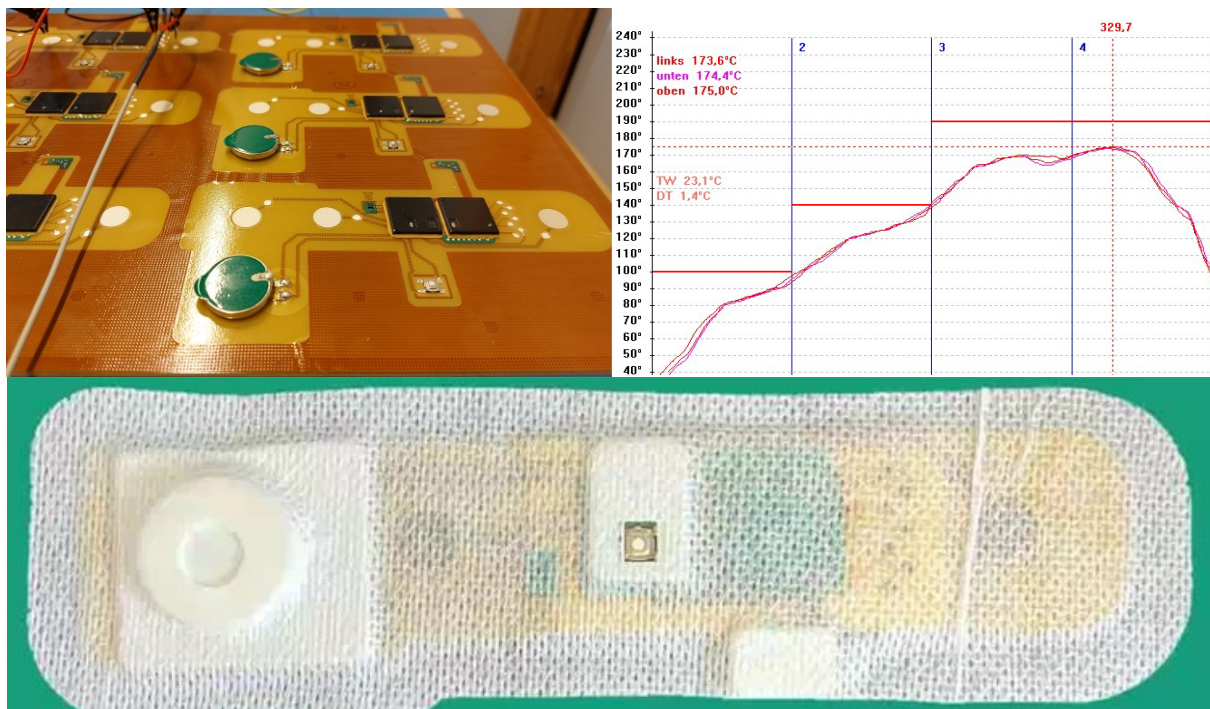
Top: MiniPatch after assembly (still on carrier) and SnBi reflow profile – Bottom: Final patch with molded SiPs
